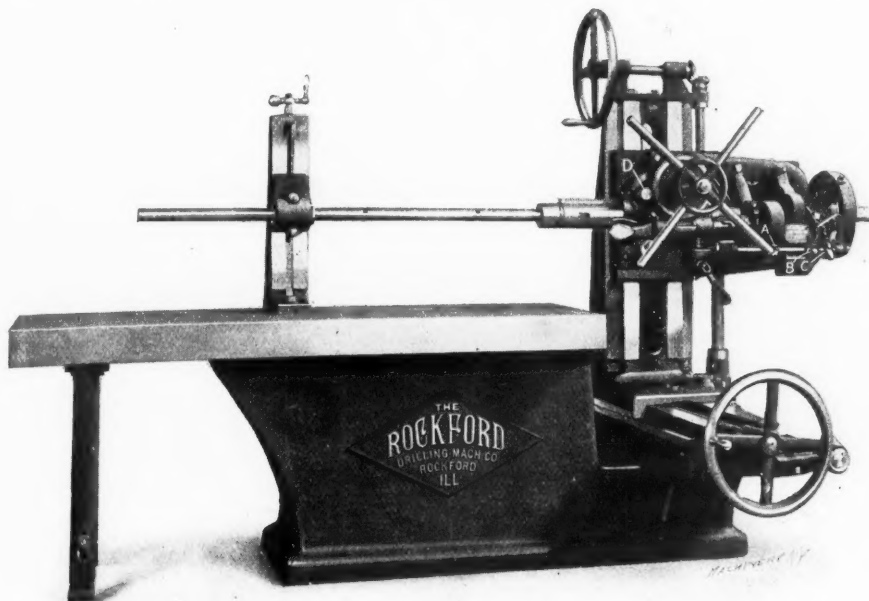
Rockford No. 2 Horizontal Boring Machine
